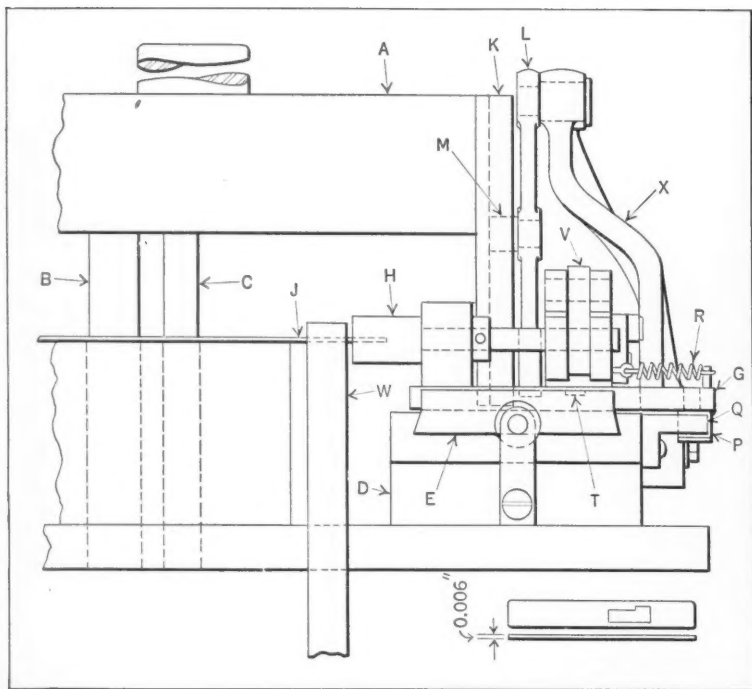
Front Elevation of Mechanism for Transferring Parts Direct from the Die to the Stacking Rod
